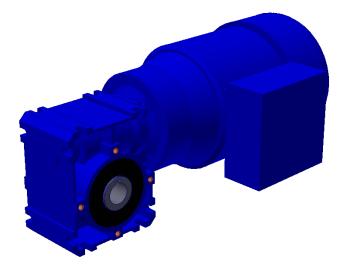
CAD drawing of the motor Worm Gears UNIVERSAL SI, SK 1SI63 - IEC80 - 80LP/4 B14 C120.
